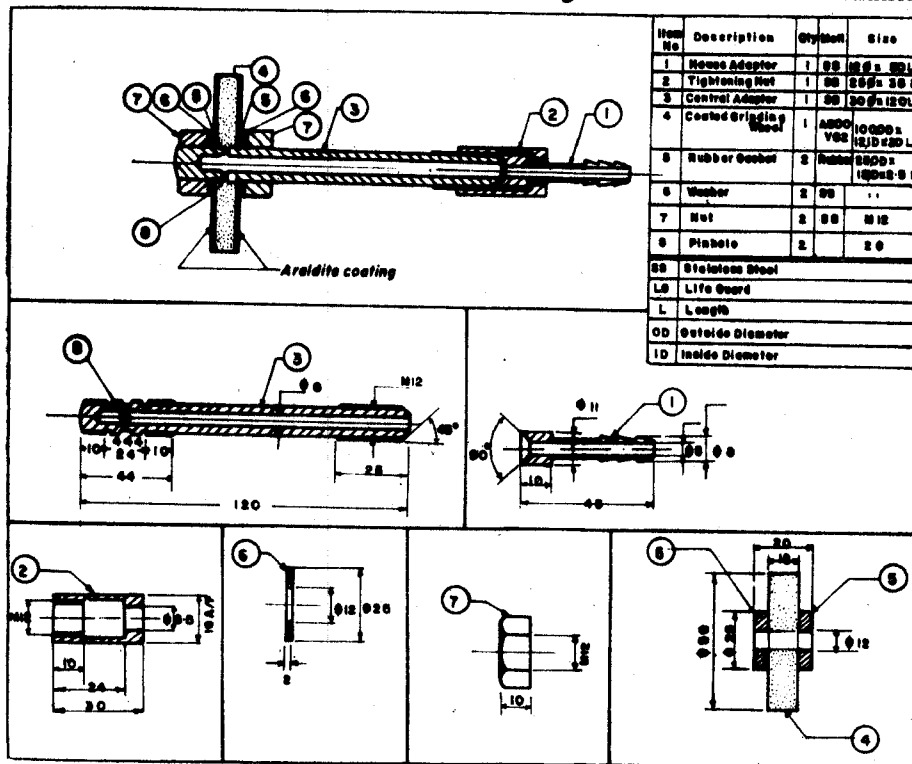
Drawing of the cross-sectional view of the air|oxygen bubbling unit showing its parts (from 1 to 7). (All dimensions in mm, figures not to scale.)
